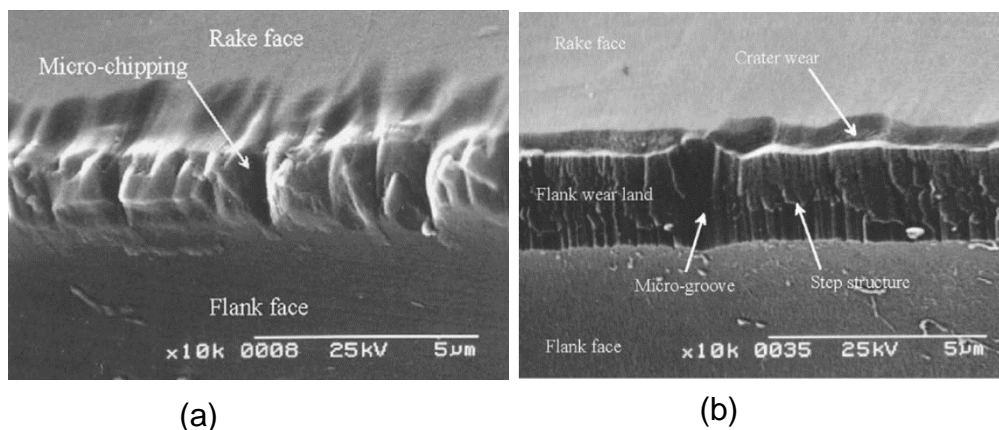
Diamond tool wear (a) Cutting edge (b) Crater and flank wear [84]
